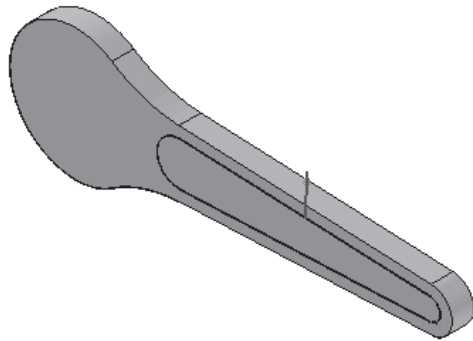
Sketch for the cutout and the direction for the cutout pointing outside the sketch
